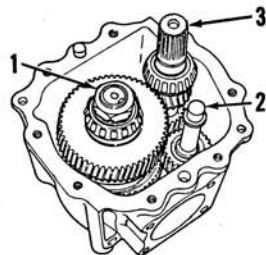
When disassembling KM2-A and KM3-A transmission first remove output shaft (1), then tap out intermediate shaft (2) followed by input shaft (3).
